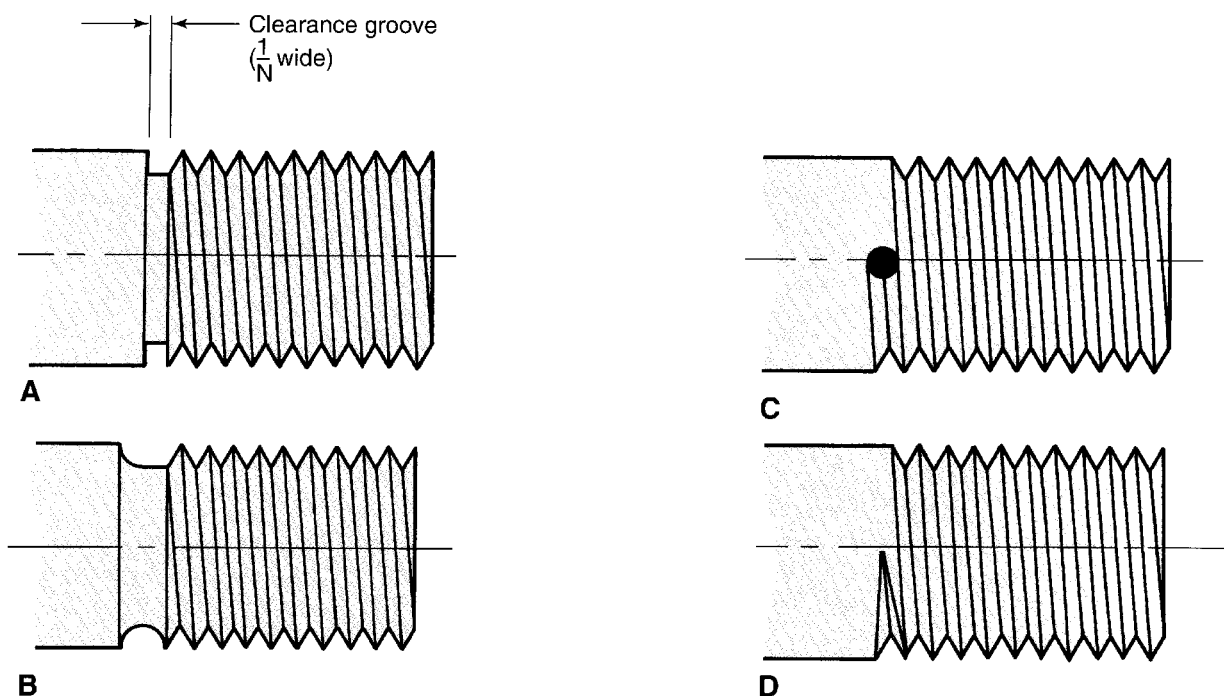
Techniques for terminating a screw thread. A—Square groove. B—Round groove. C—Small shallow hole. D—Tool withdrawn from thread at end of cut.
